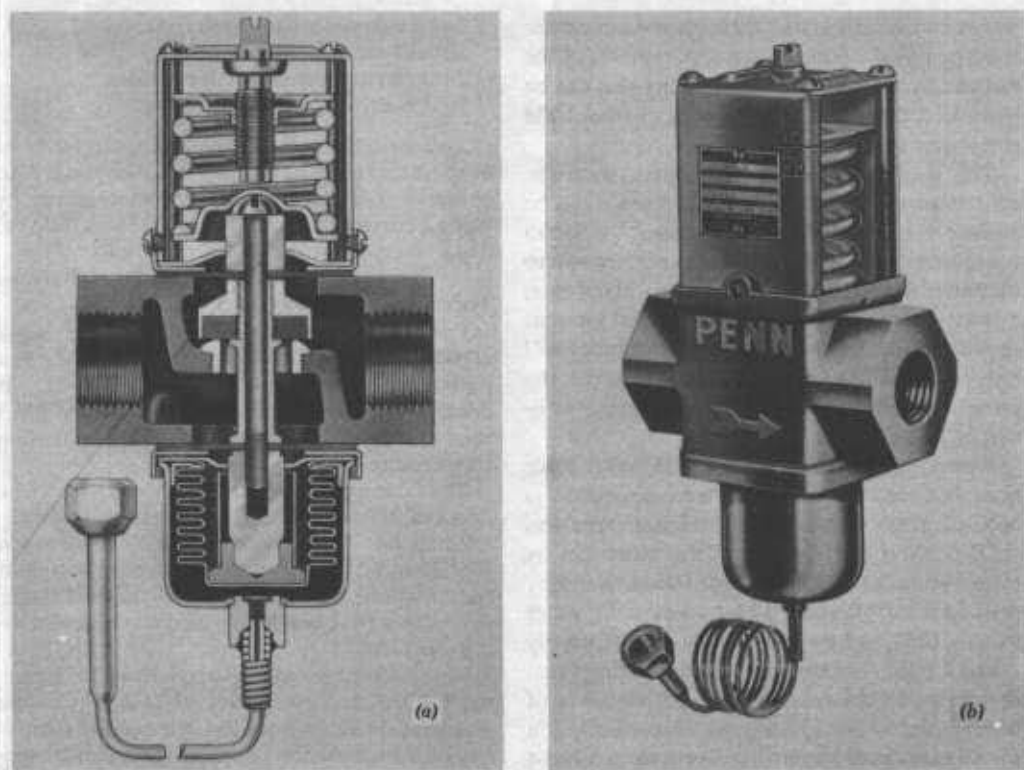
Typical threaded-type water regulating valve. Larger sizes are available with flange connections. (a) Cross-sectional view showing principal parts. (b) Exterior view. (Courtesy Penn Controls, Inc.)
